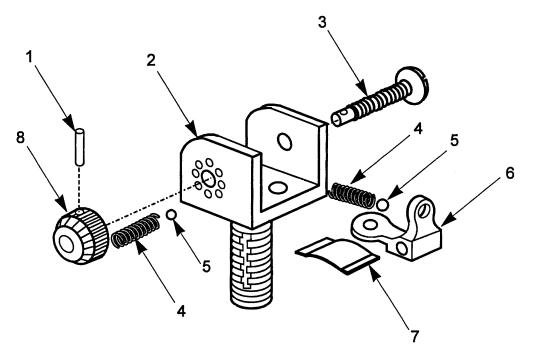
B. Rear Sight Assembly (M16A4, M4 and M4A1) 12951026.
